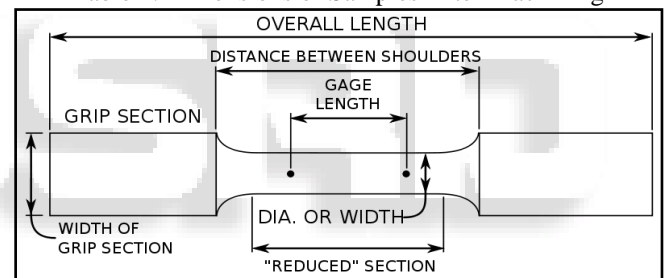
ASTM Dimension for Tensile Test of Specimens
